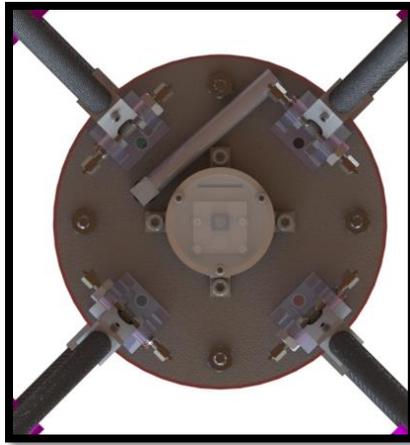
TDS Camera housing mounted onto Lower Bulkplate Assembly.
